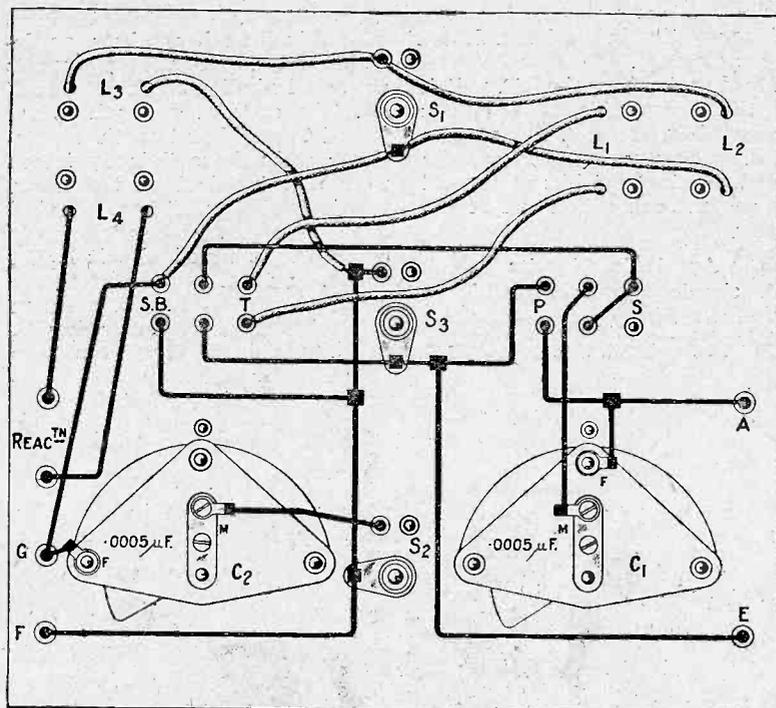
If this wiring diagram be used in conjunction with the back-of-panel photograph given on the previous page, no difficulty will be encountered in wiring up the instrument. Full size Blue Print No. 105b may be obtained.
